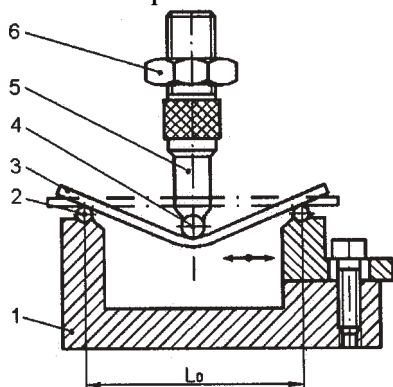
Bending device; 1 -bending plate, 2 -rolls, 3 -specimen, 4 -punch, 5 - support, 6 -fixing device
